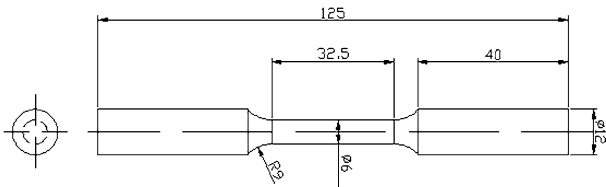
Geometry of die-cast tensile test specimen (mm).
